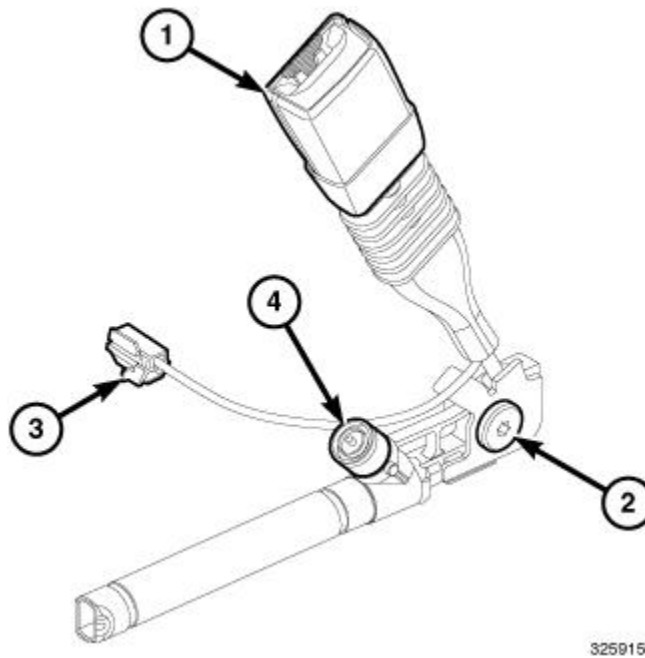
Seat Belt Tensioner Initiator, Buckle And Tensioner, Switch Pigtail Wire Connector & Screw
